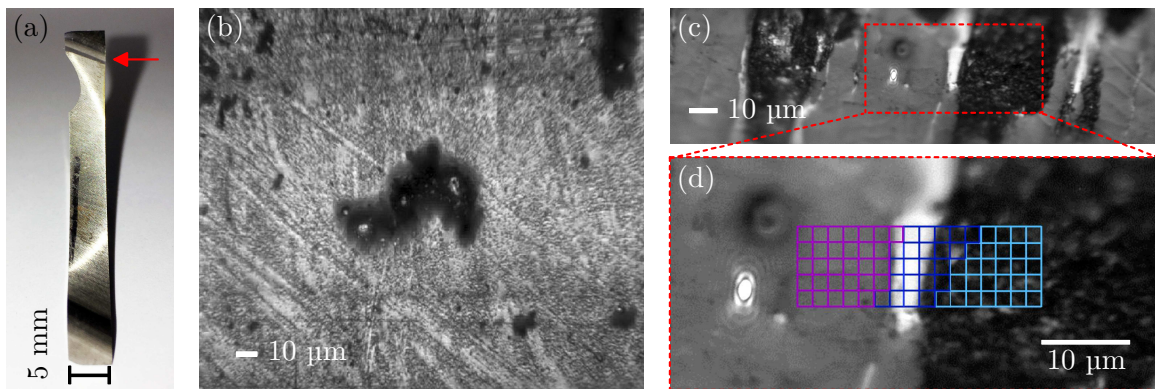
(a) Resected part of the female screw rotor. The red arrow indicates the contact line zone on the clipped part. (b) A focus stacked¹ image of a $150\ \mu\text{m} \times 150\ \mu\text{m}$ sized surface region of the screw rotor, composed from multiple optical images. (c) Heavily worn domains at a different position of the contact-zone, magnified in panel (d). Here, the area studied is divided into 80 squares of $2 \times 2\ \mu\text{m}^2$. The bright spot on the left side originates from the laser beam. Reproduced with permission from reference [Mol18].
